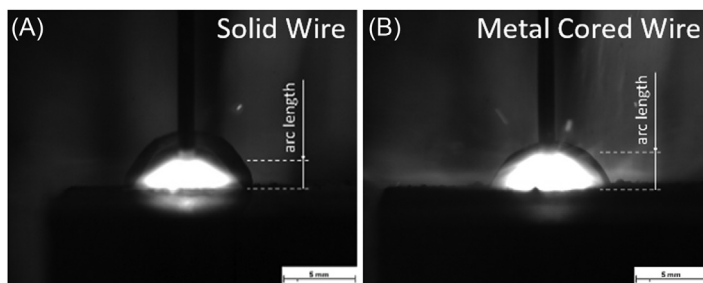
High-speed images of weld bead deposition in front view for (A) solid wire and (B) metal cored wire with cold metal transfer; similar arc characteristics are observed, with minor differences in maximum arc length and arc geometry.
